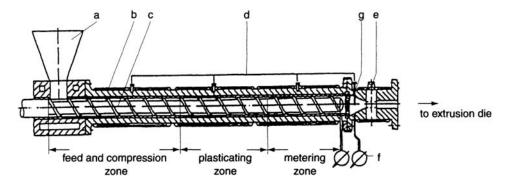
Design of an extruder plasticating barrel: (a) feed hopper; (b) heaters; (c) screw; (d) thermocouples; (e) back pressure regulating valve; (f) pressure gauges; (g) breaker plate and screen pack
